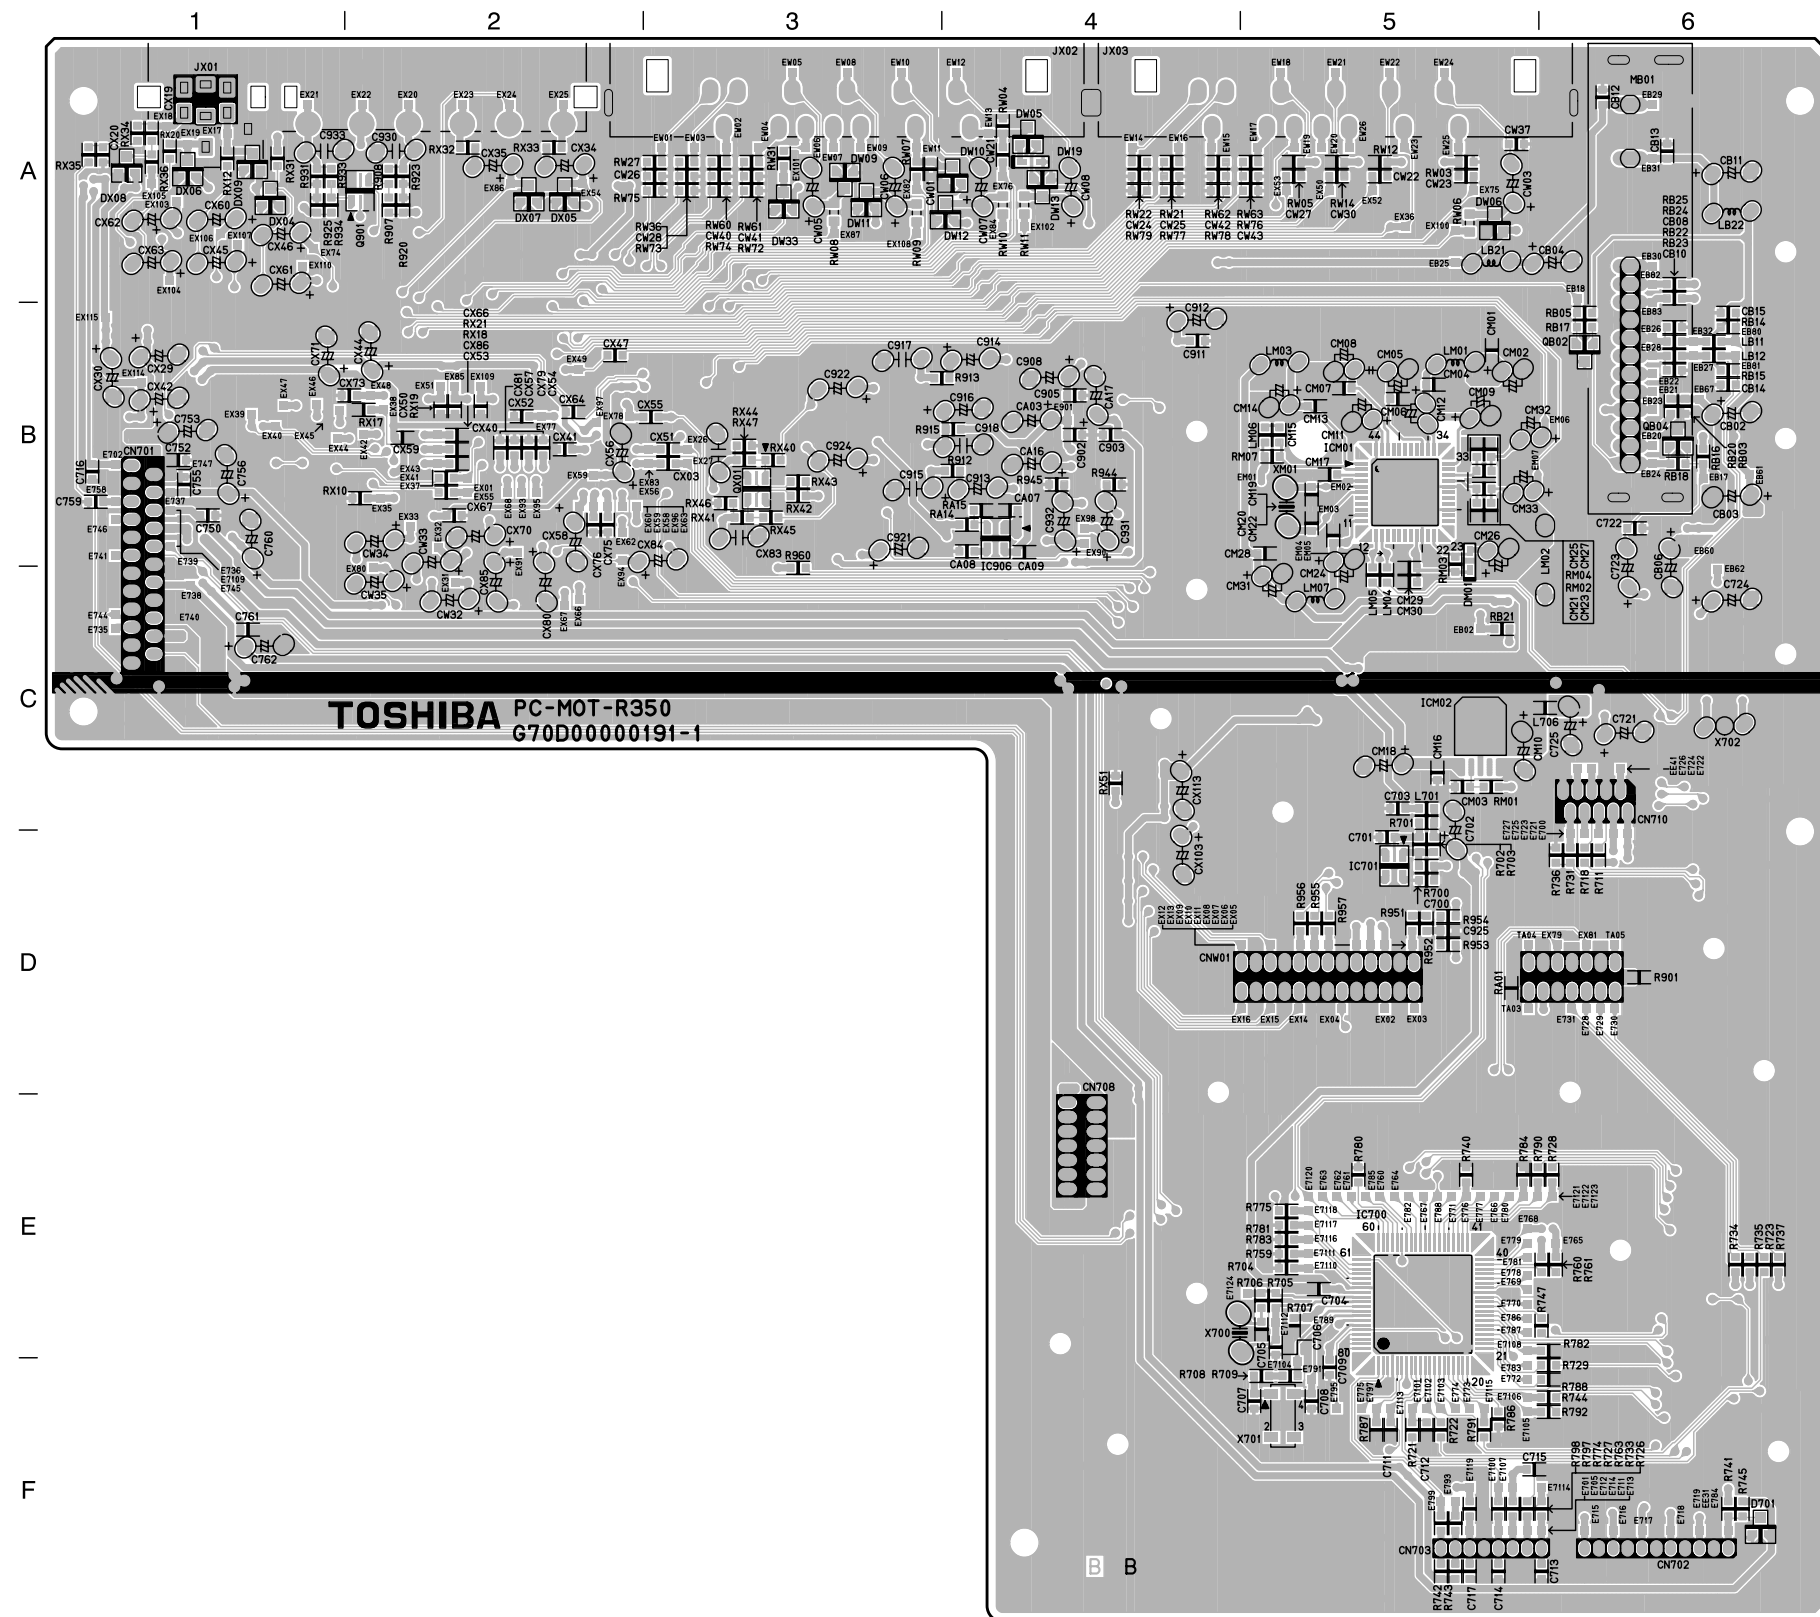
EU05 Mother PC Board (Bottom side)
